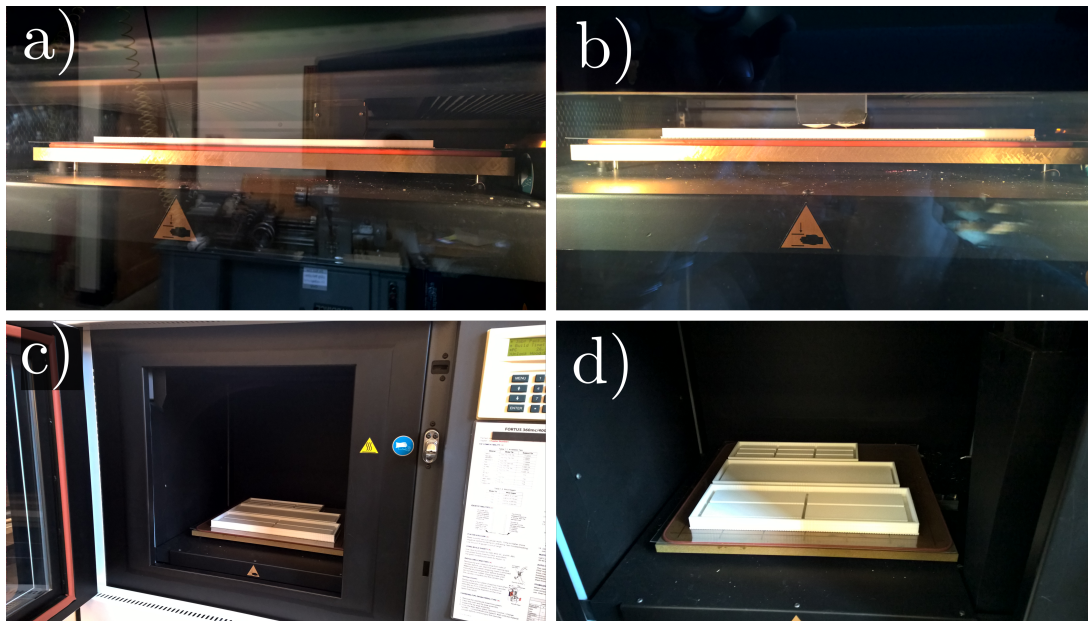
Single edge notch mold positive printing process: a) view from outside of the machine while printing is in progress; b) additional view where printing head can be seen; c) view of finished mold positives; d) detail of finished mold positives
